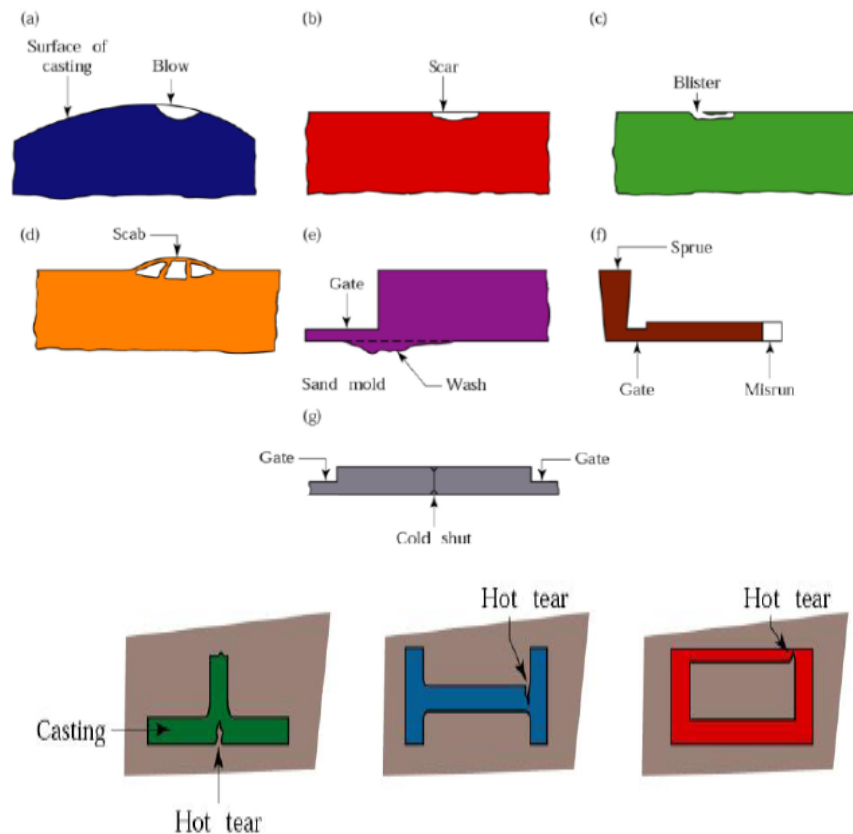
Defects observed in aluminium and its alloys by using sand casting process
